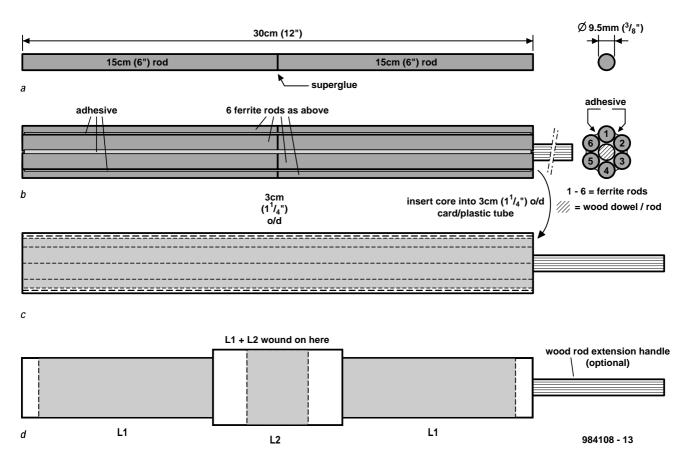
Build the Ultima in this order. Forming a single 30 x 1 cm (a); and a single 30 x 3.2 cm ferrite core (b). Drawing (c) shows the 30 x 3.2 cm ferrite winding assembly, and drawing (d) the format of the final ferrite core.
